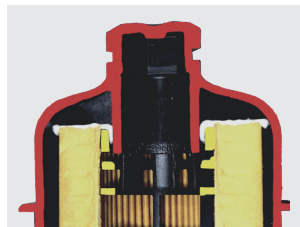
When assembled, the fleece (white) is pressed in between the inner tube (yellow) and the standpipe (red) to create a complete seal
